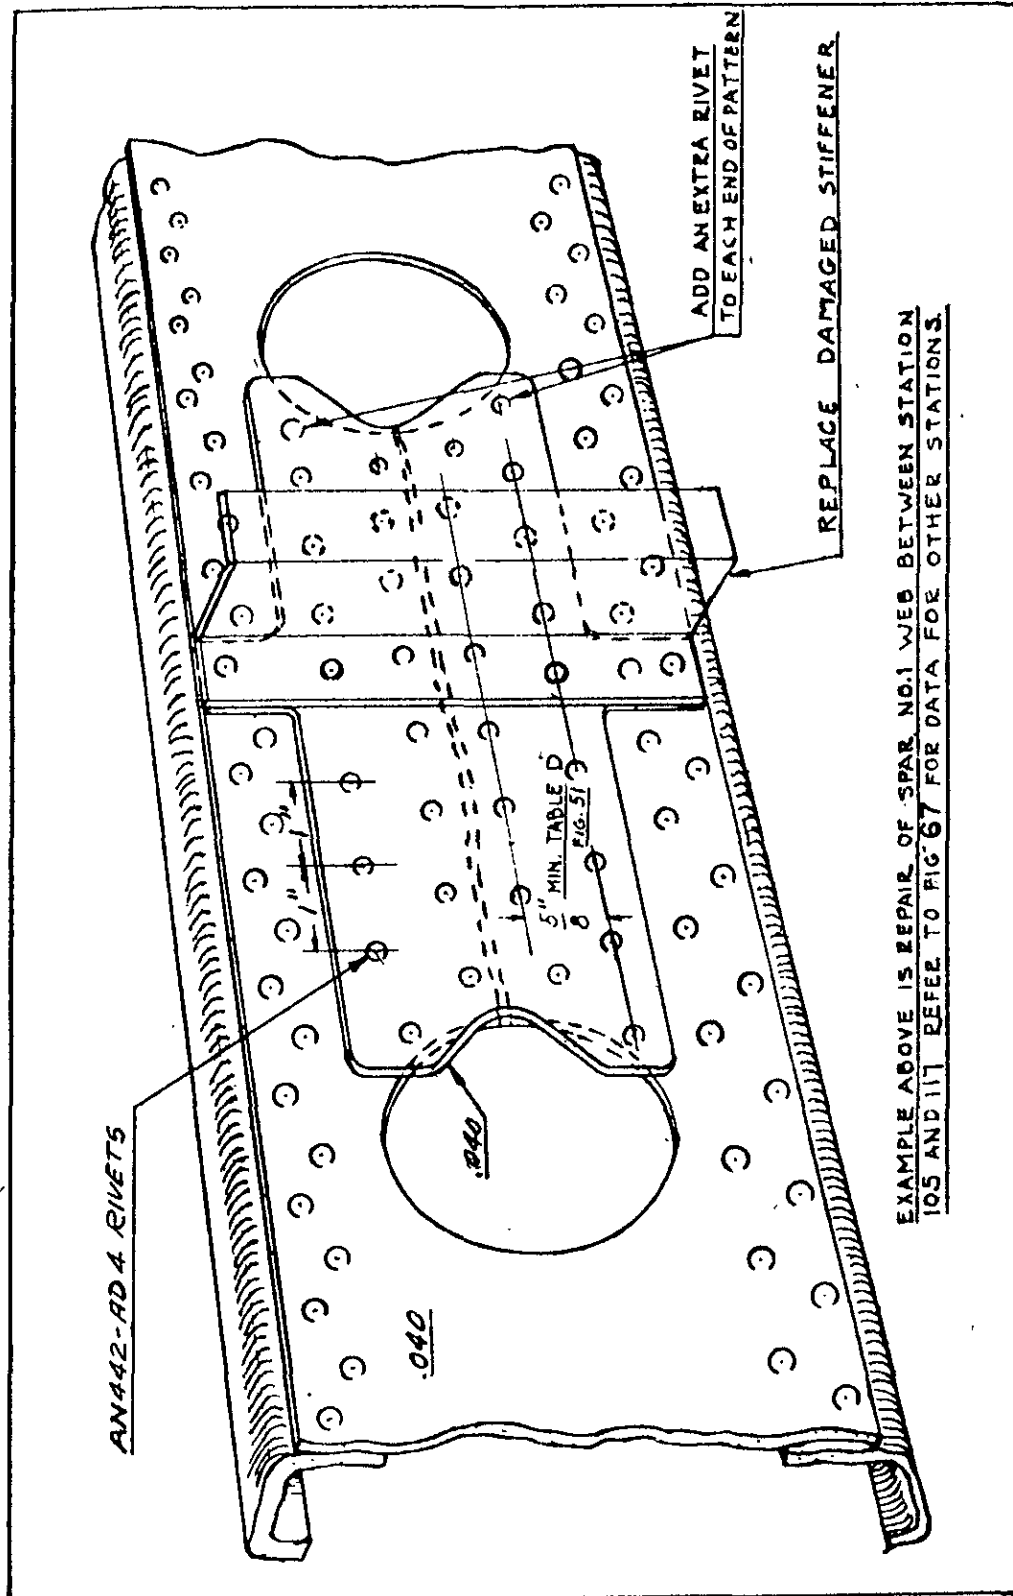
Wing - Spar Fracture Between Lightening Holes
